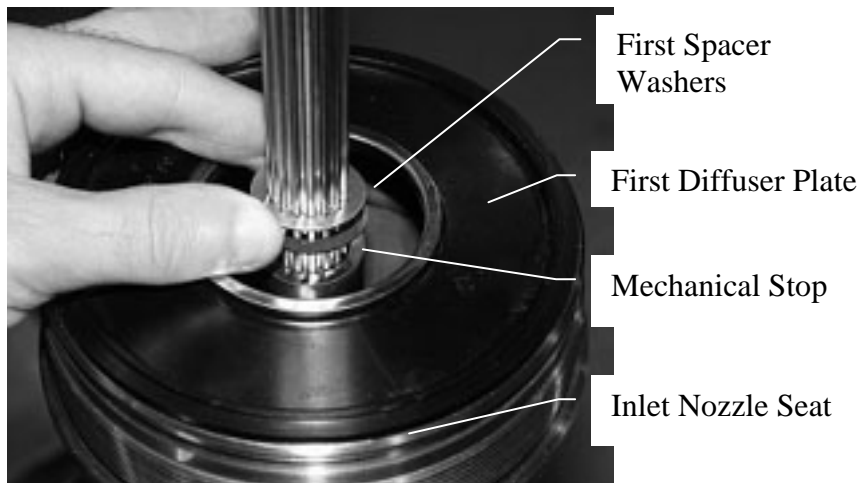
Adjust the Gap Between the Impeller and Diffuser Plate Using Spacers
